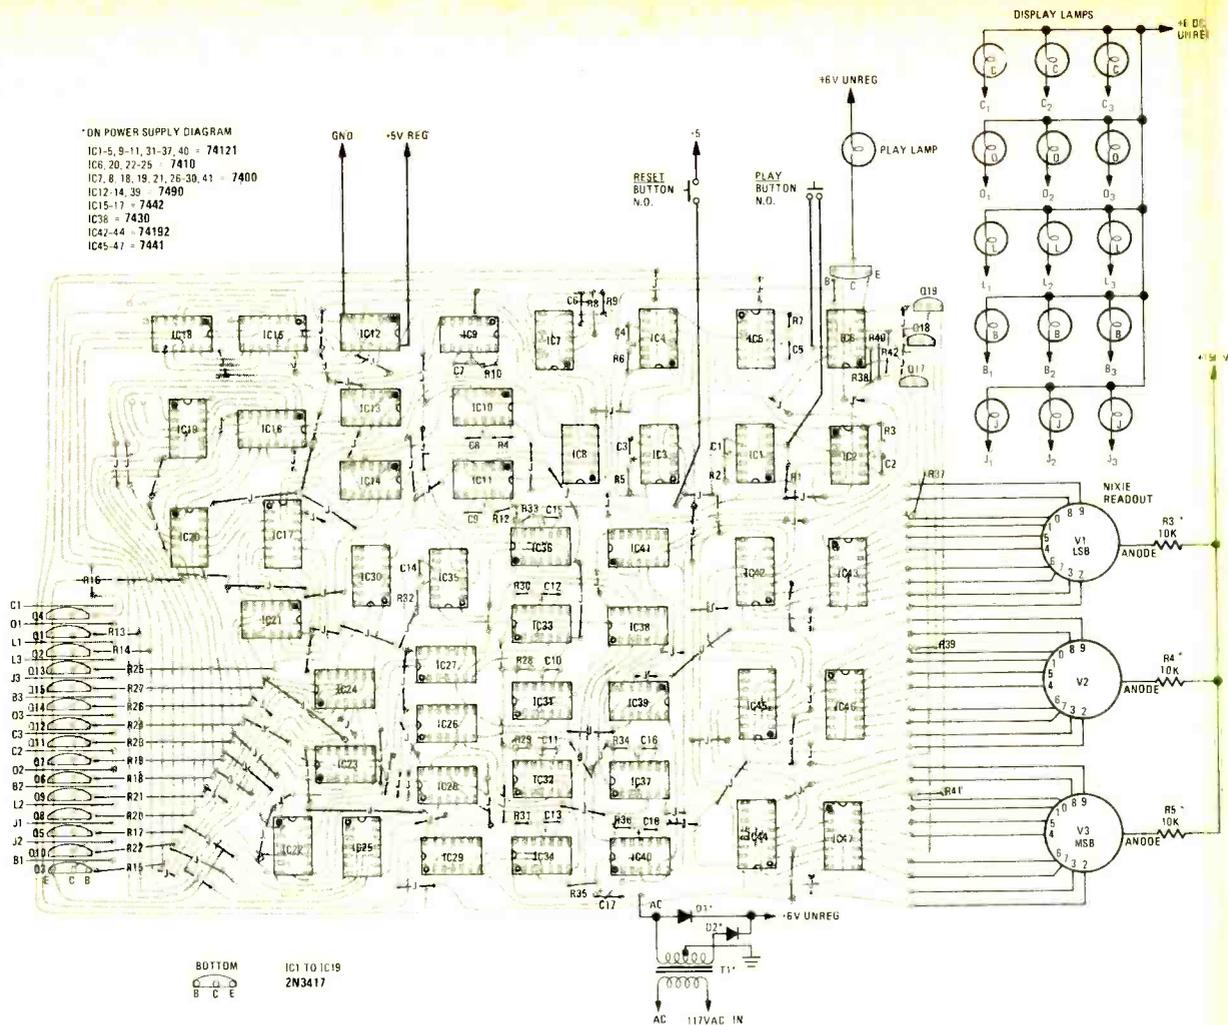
THE BOARD LAYOUT, showing jumpers and leads to components mounted on panel.
